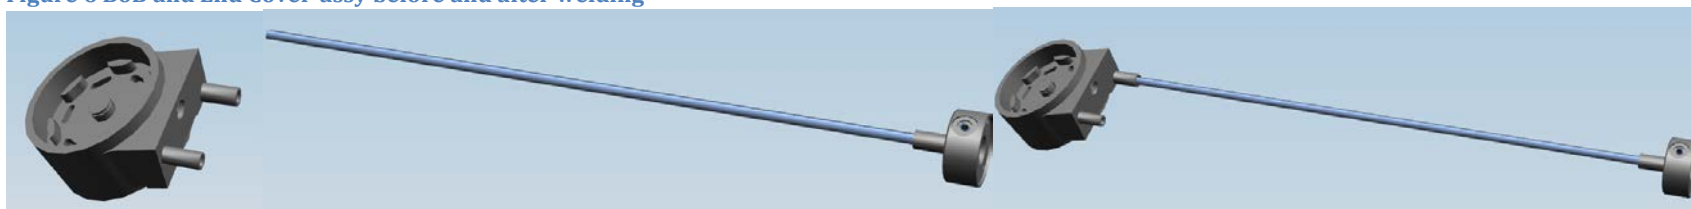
Anchor BoB and End Cover Assy before and after welding
